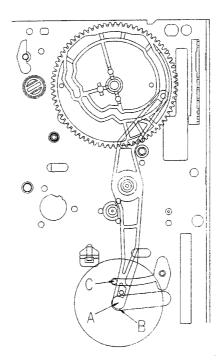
DATUM POSITION OF RELAY LEVER & CAM GEAR
